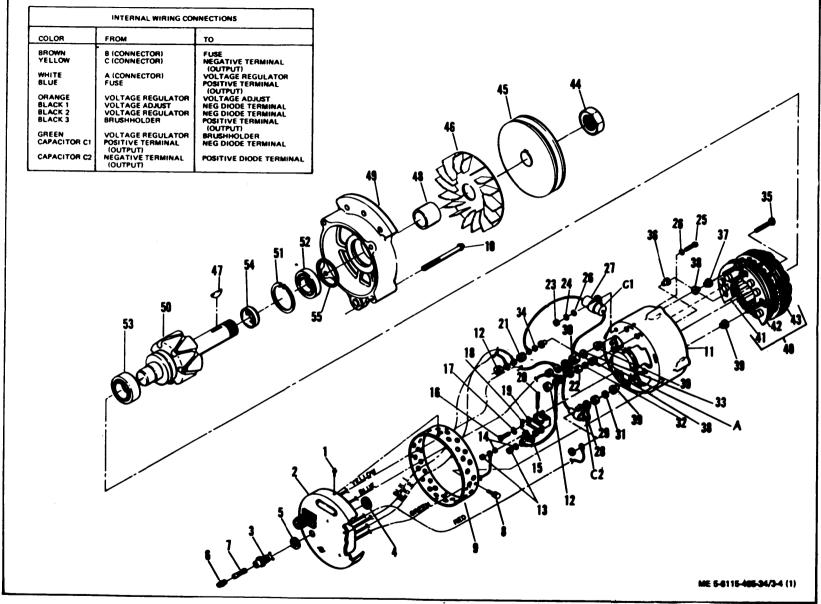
Alternator Assembly, Exploded View (Sheet 1 of 2)
